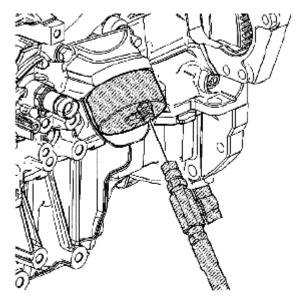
Identifying Special Tools J 45299 Courtesy of SUZUKI OF AMERICA CORP.
